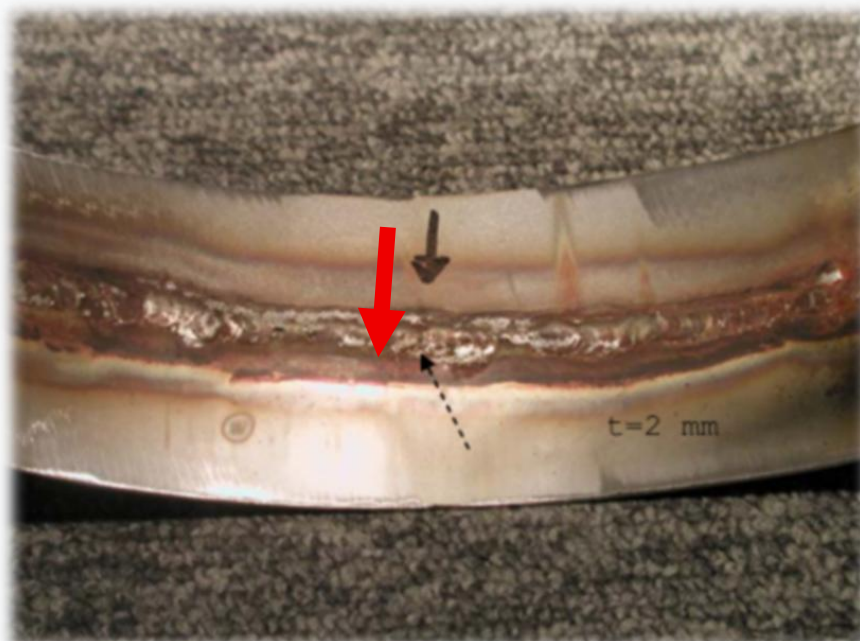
Overview of the section with circular weld received for examination.
